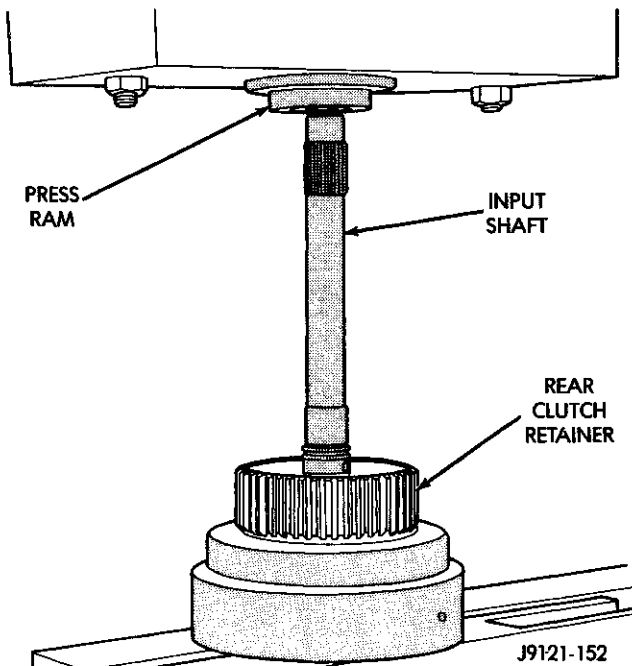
Pressing Input Shaft Into Rear Clutch Retainer
